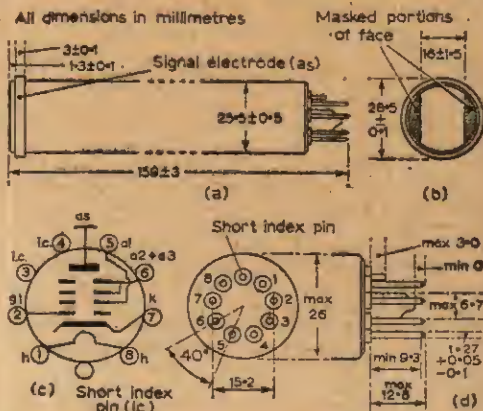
The Mullard 1in. vidicon camera tube: (a) the overall dimensions, (b) dimensions of the faceplate, (c) the camera tube symbol and pin numbers and (d) details of the base.
